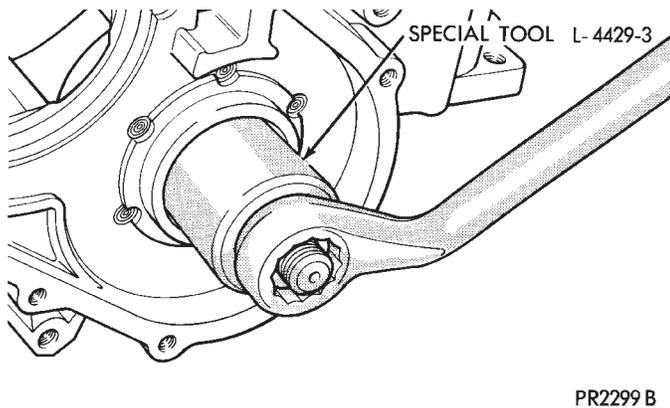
Remove Output Shaft Gear Bearing Cup
